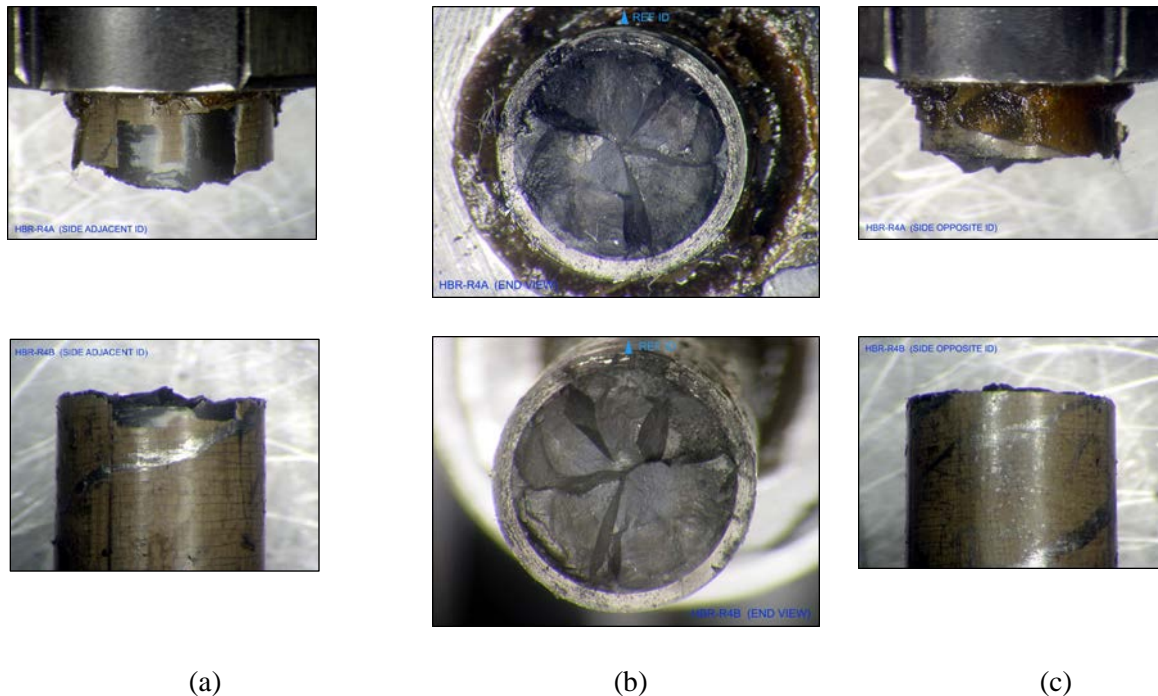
(a) Lateral or front view, (b) transverse view, and (c) back view of fracture surface for HBR R4 tested at $\pm 8.89 \text{ N}\cdot\text{m}$, 5 Hz, $N_f = 2.7 \times 10^5$ cycles.
